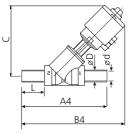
Dimensional drawing of FMPAV- Sanitary tube ends ASME BPE
